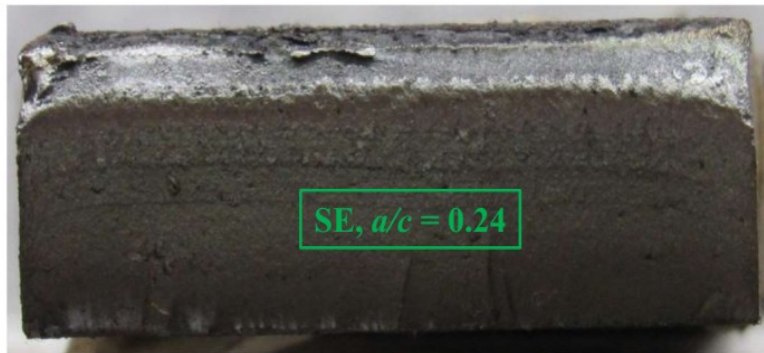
Fracture surface for the as-welded 350W steel specimen under VA1 loading
